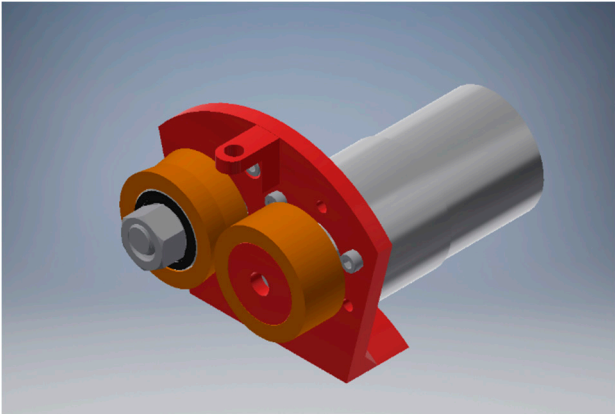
Rendering of filament driver of the open-source 3-D printable pelletizer chopper.
